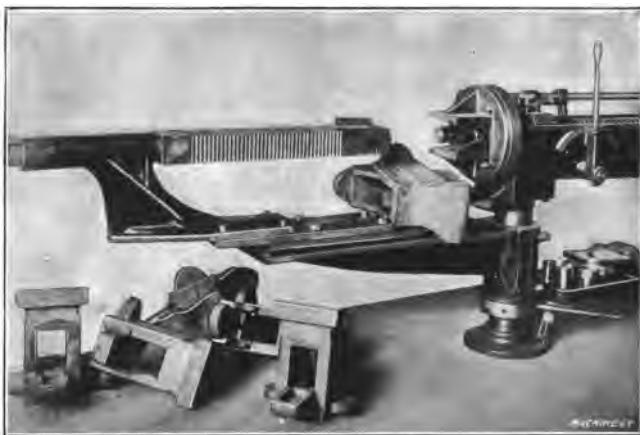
Showing Heavy Broach supported on Bracket ready for placing Work in Position
